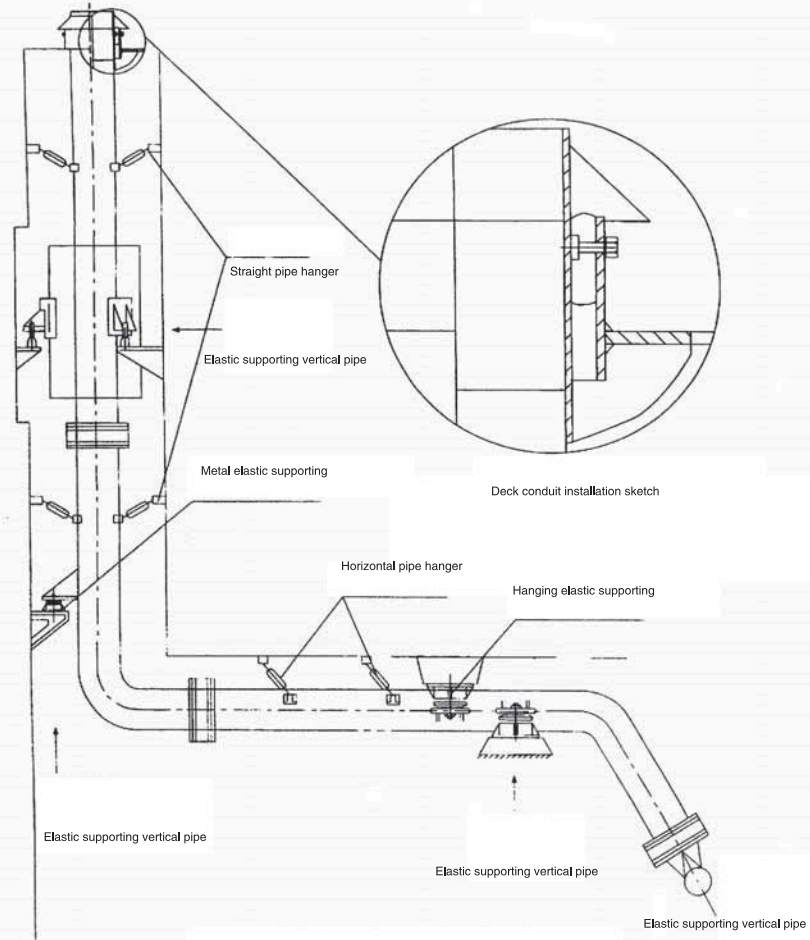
Spring hanger and metal elastic supporting schematic drawing
